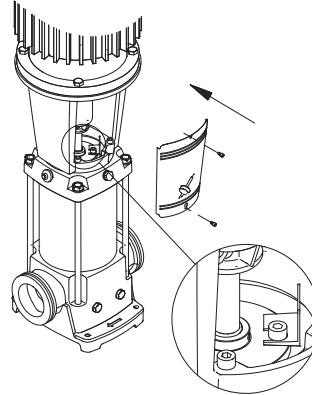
Adjusting fork storage CR, CRN 32, 45, 64, 90, 120, and 150
